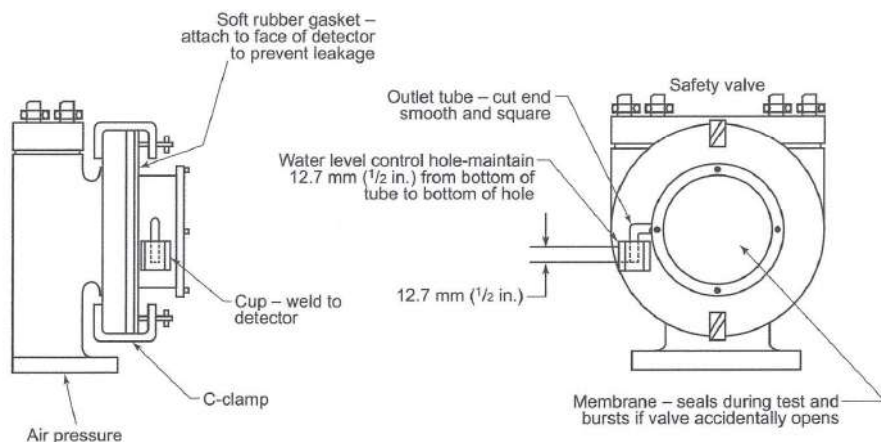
Device to Relieve Body Pressure Caused by Accidental Popping of the Valve
